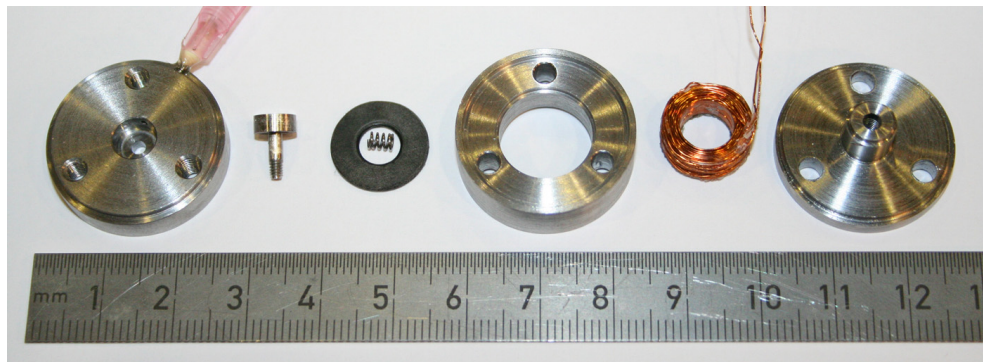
The actuator prototype disassembled. From left to right: lower part of the body, armature and its stem, plastic seal with the return spring in the middle, middle part of the body, coil and upper part of the body.
